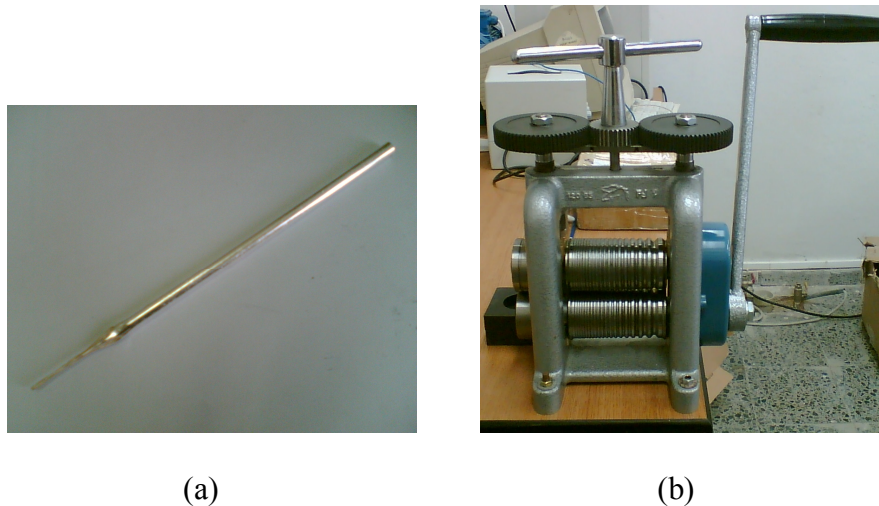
(a) One of the open ends sealed empty silver tube with an outer diameter of 6.35 mm (for the MgB_2/Ag monofilament wire production) (b) Groove rolling machine.
